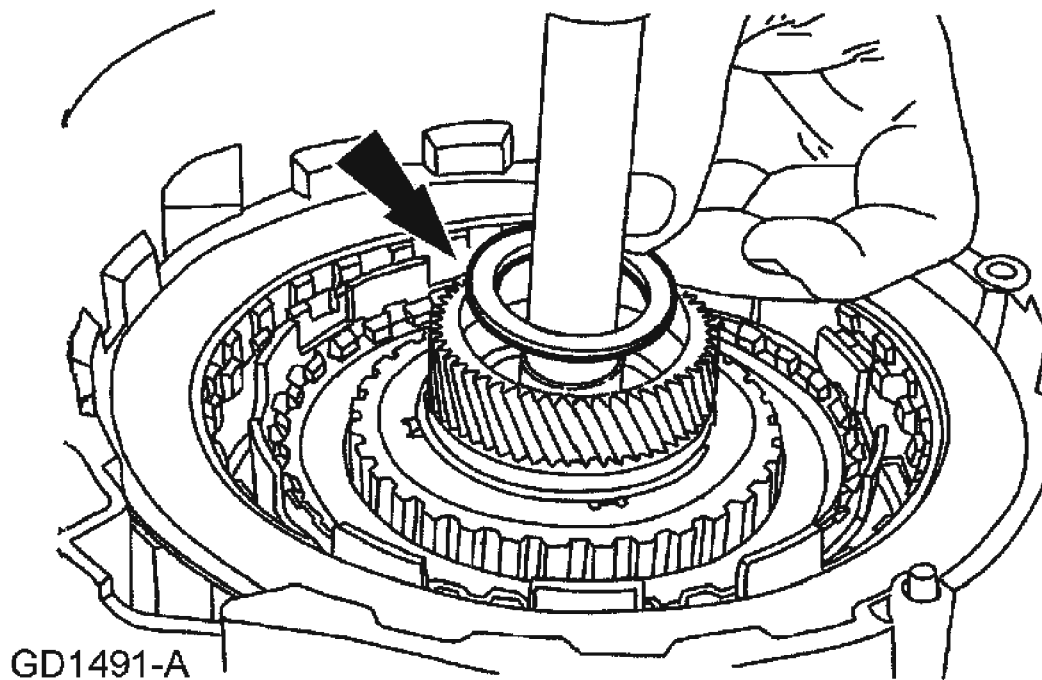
Removing No 6 Low/Intermediate Carrier Thrust Bearing
